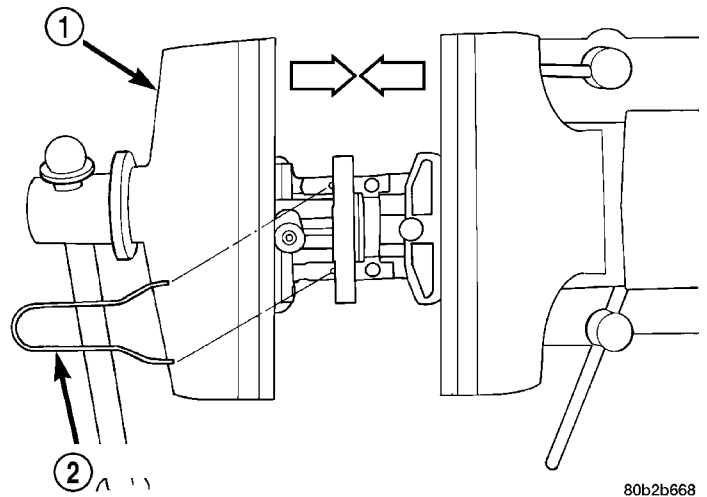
Locking Camshaft (Secondary) Chain Tensioner
